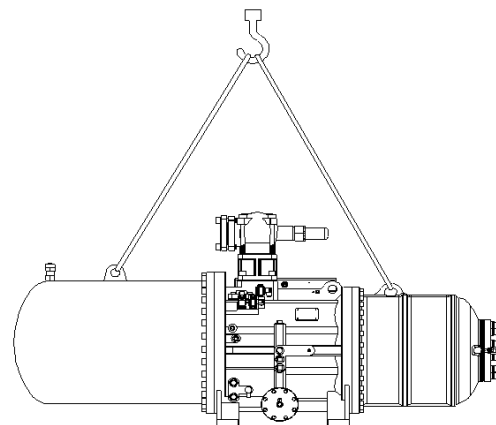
RC2-1020 and RC2-1130 lifting instruction
